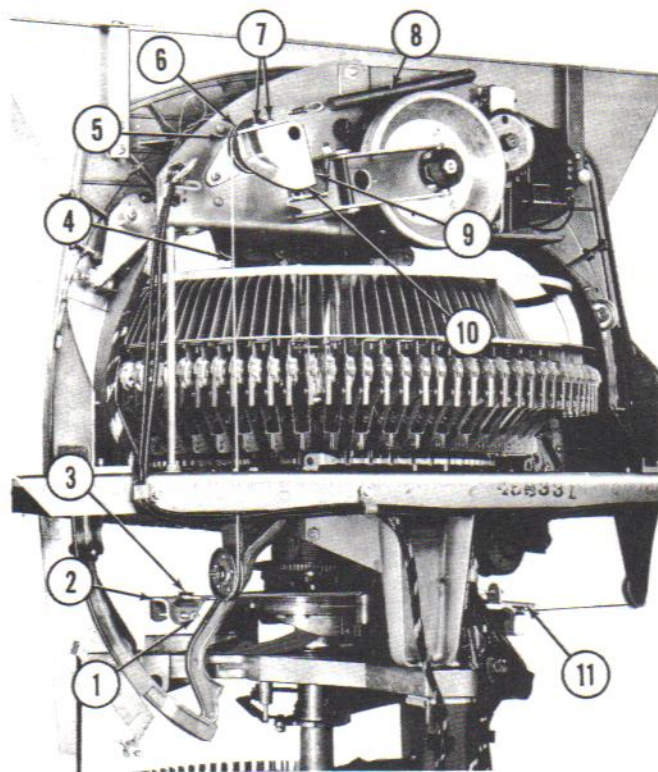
ACTUATING ARM AND CABLE ADJUSTMENT
